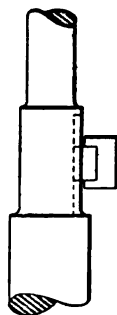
Method of Mounting Crank-shaft in Fixture.
